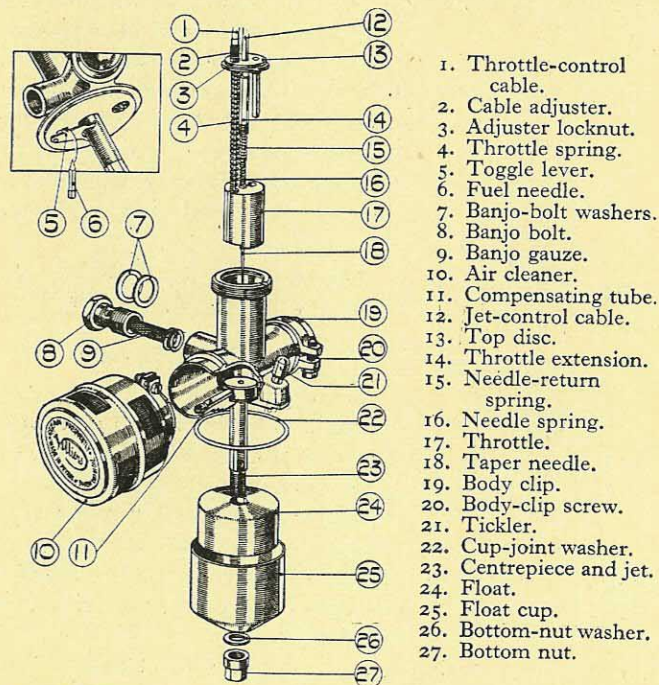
EXPLODED VIEW OF TYPE 4/5 CARBURETTER FITTED TO MARK 6E UNIT.
